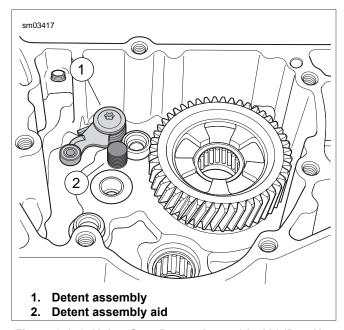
Using Gear Detent Assembly Aid (Part No. B-45520)
